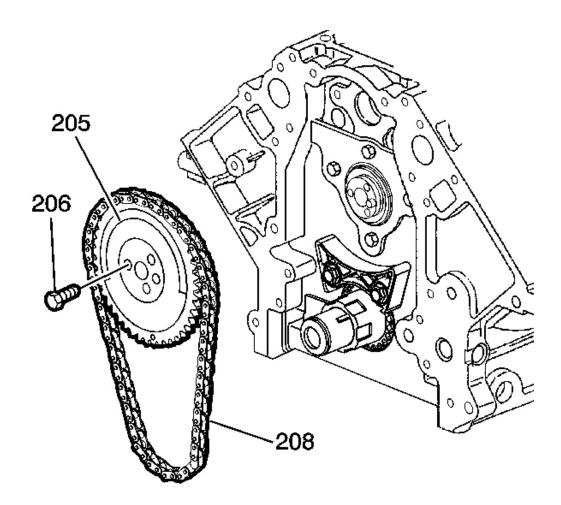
View Of Camshaft Sprocket, Bolts & Timing Chain Courtesy of GENERAL MOTORS CORP.
